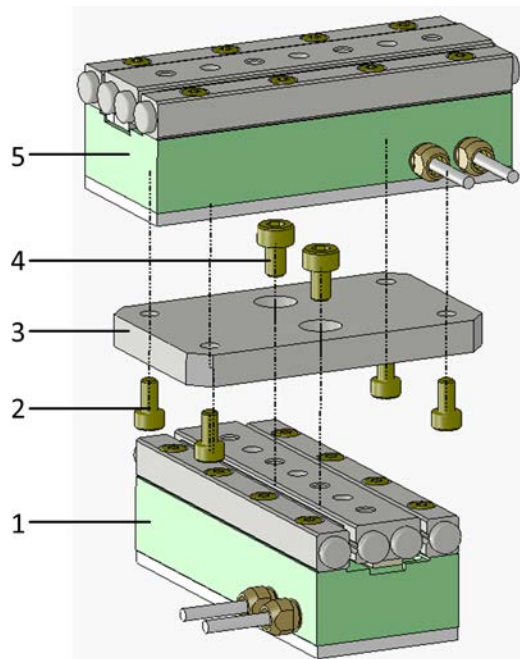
Example: Setting up an XY system consisting of two LPS-24 5862-9-1230 and the N-662.AP2 adapter plate
